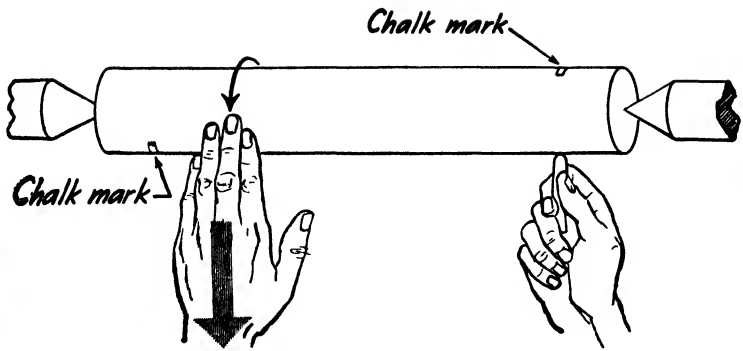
To test the accuracy of center-punch marks, mount the shaft between centers and spin it by hand, and mark the high points with chalk. (South Bend Lathe Works)
